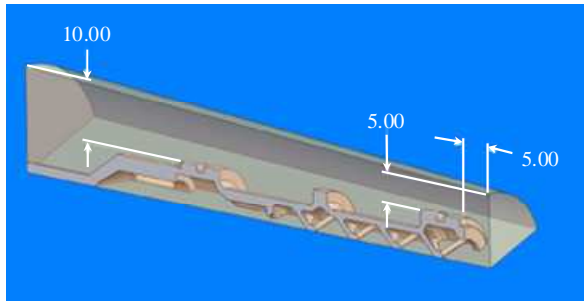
Longitudinal slice of conical ceramic mold (dimensions in mm).
